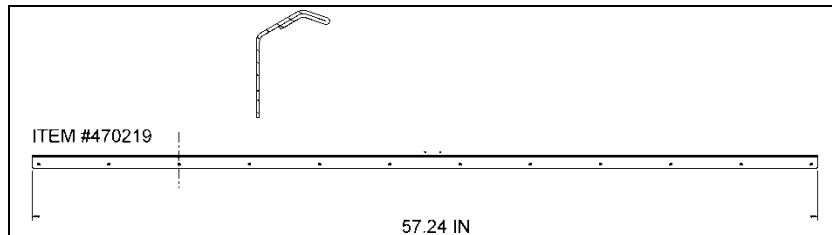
H3 SERIES LOWER DRIP EDGE
